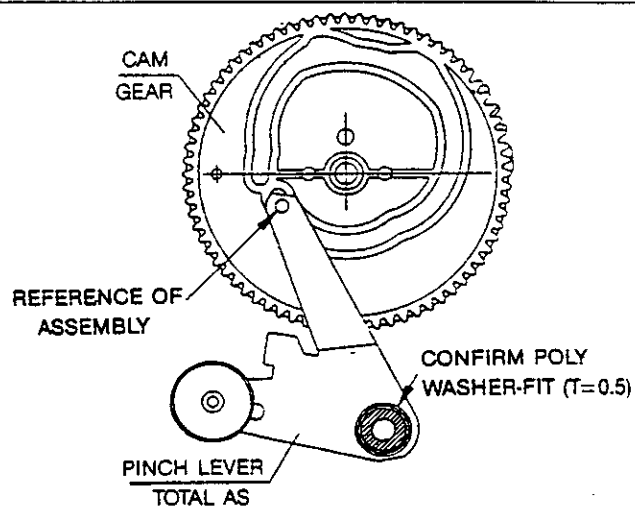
Reference of assembly for the Cam Gear and Pinch Lever
